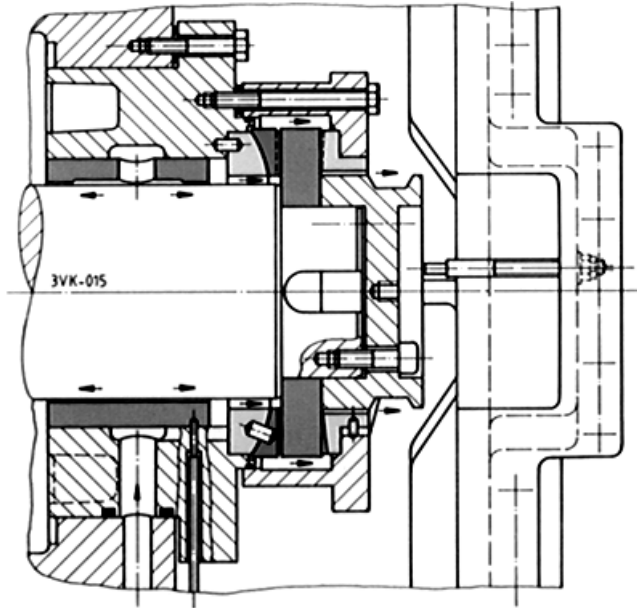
Radial and thrust bearings furnished with large rotary screw compressors. (*Aerzen USA Company, Coatesville, Pa.*)
